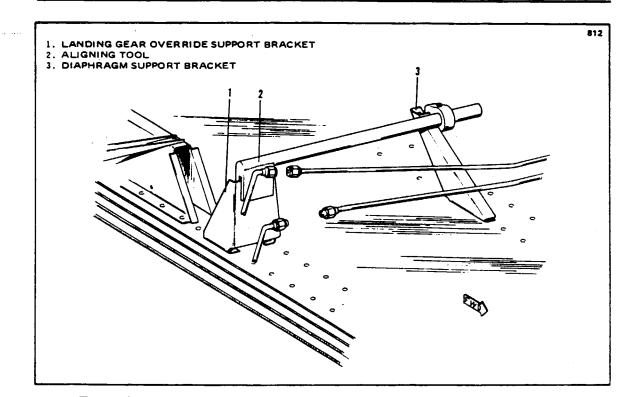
Checking Aligning Brackets of Gear Back-Up Extender Actuator
